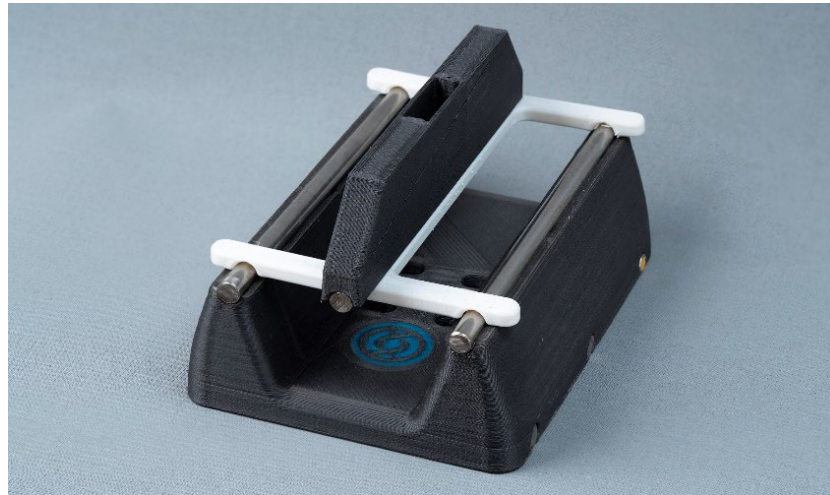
Photography of a 3D printed adapter base with PA12-CF.
